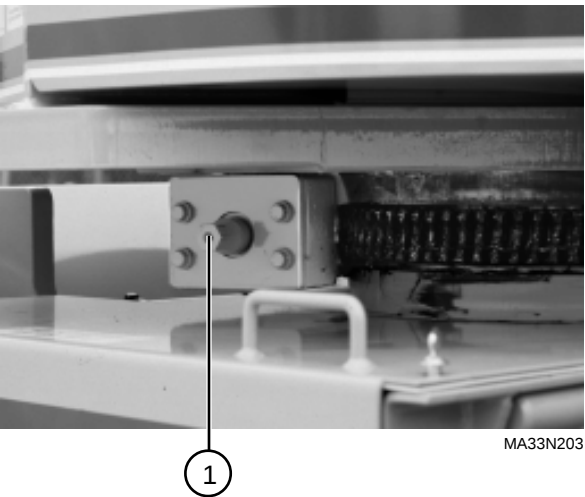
A. Emergency Turret Rotating Mechanism (SJKB-33N)
